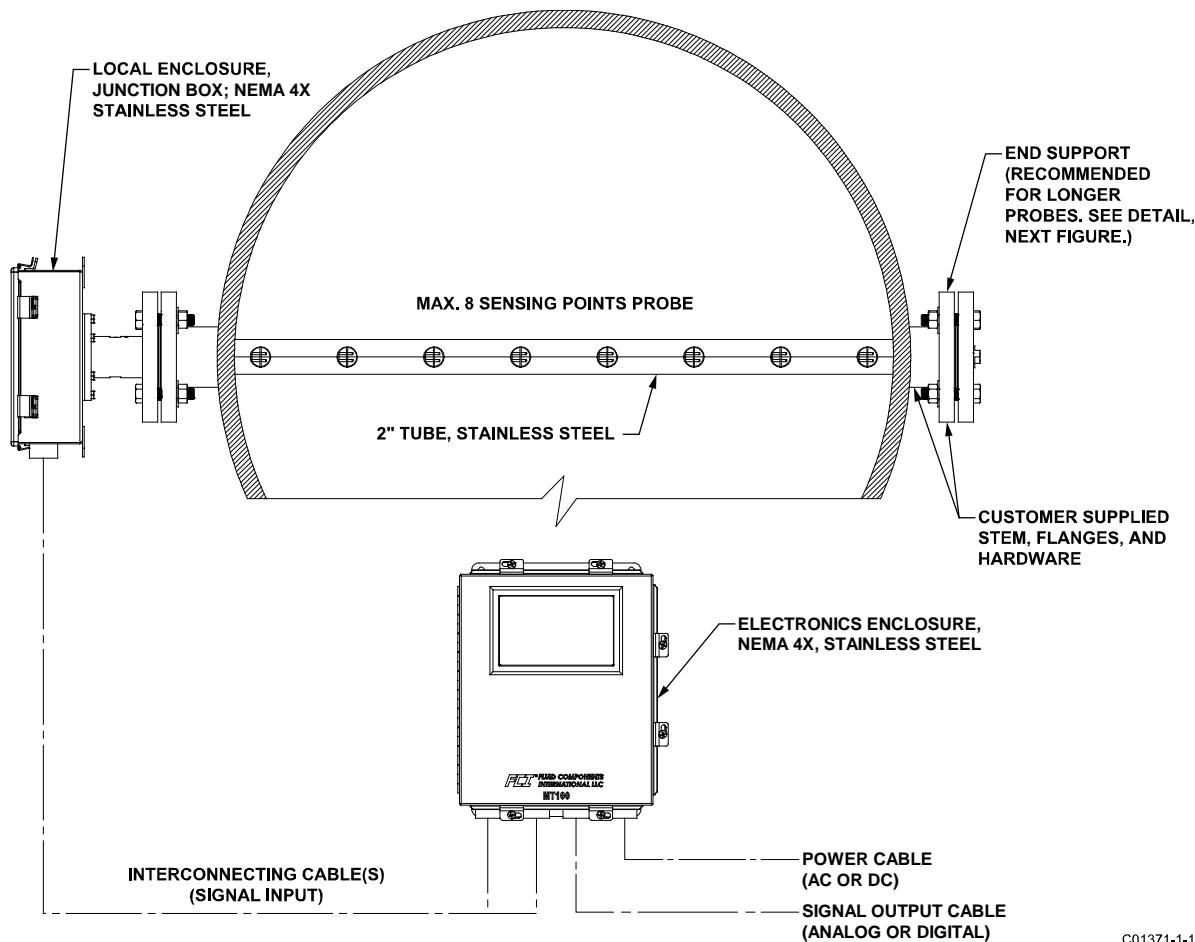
Multipoint Flanged Sensor Probe Example Installation
